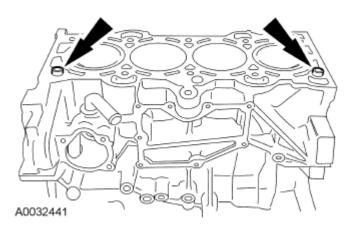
Locating Cylinder Head Alignment Dowels Courtesy of FORD MOTOR CO.
